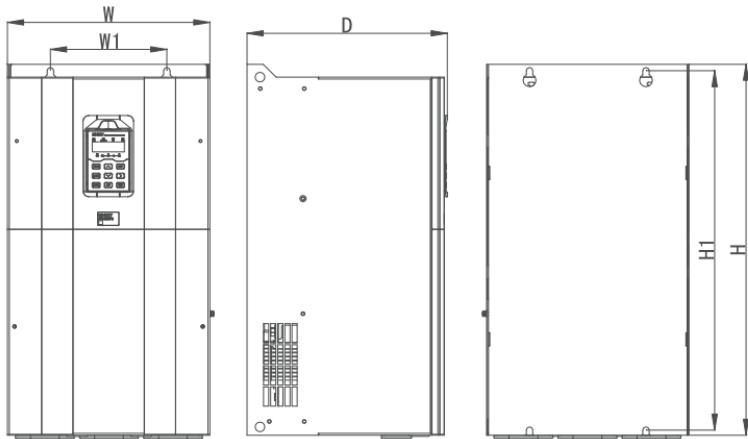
Installation Dimensions of T6-T7 Shell Frame Outline
